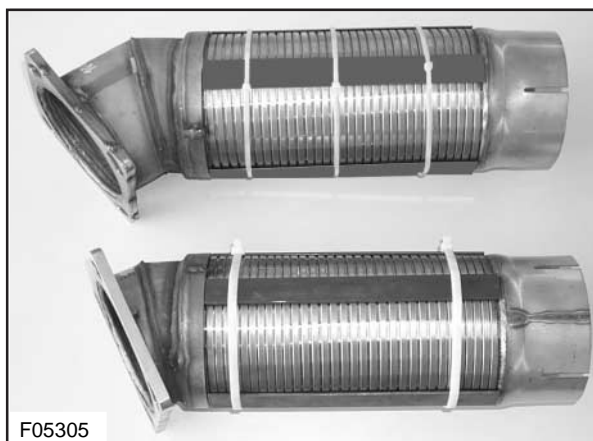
Detroit Diesel flex assembly VH 10699820 (top) is longer than Cummins assembly VH 10699822 (bottom).
